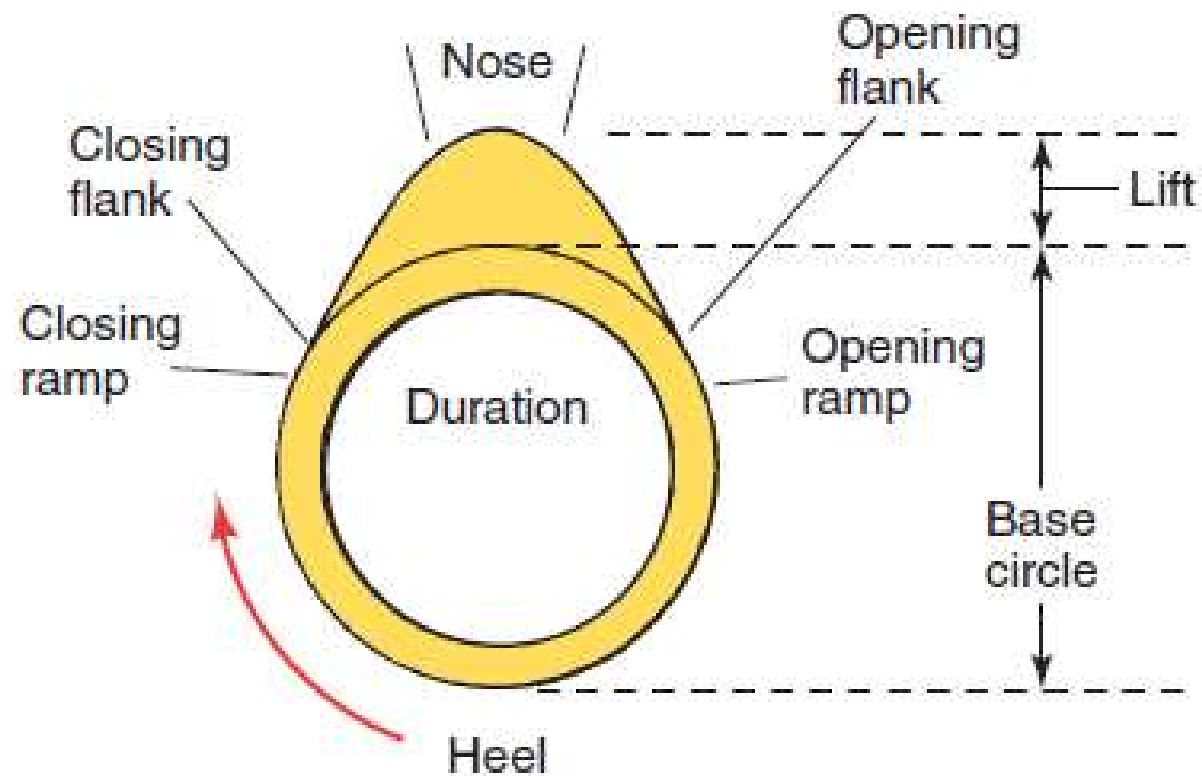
The height and width of a cam lobe determine when and for how long a valve will be open.
